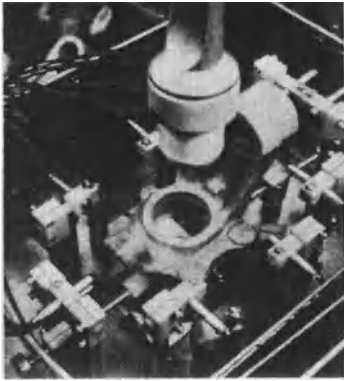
Swivel-bearing in test position in the immersion tank of the installation of Fig. 27.6
